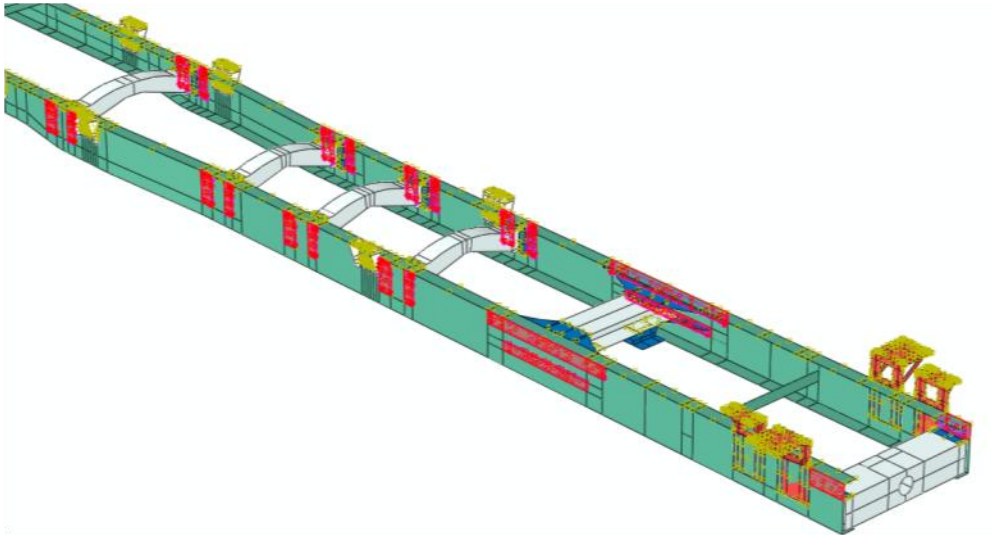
Clamp attachments between the chassis and the auxiliary chassis
